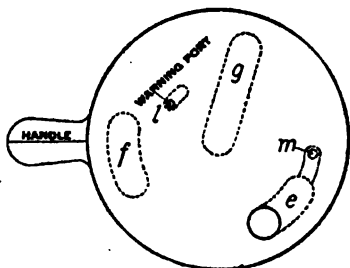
Rotary Valve of S-6 Independent Brake Valve. automatic brake valve. If the automatic brake valve handle is in *Running* position and the independent brakes are being operated, they can be released by simply returning the independent valve to *Running* position, as the application cylinder pressure can then escape through the release pipe and the automatic brake valve.
